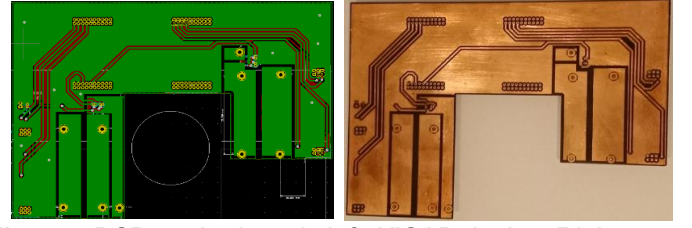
PCB motherboard : left :KiCAD design; Right : Realized PCB
